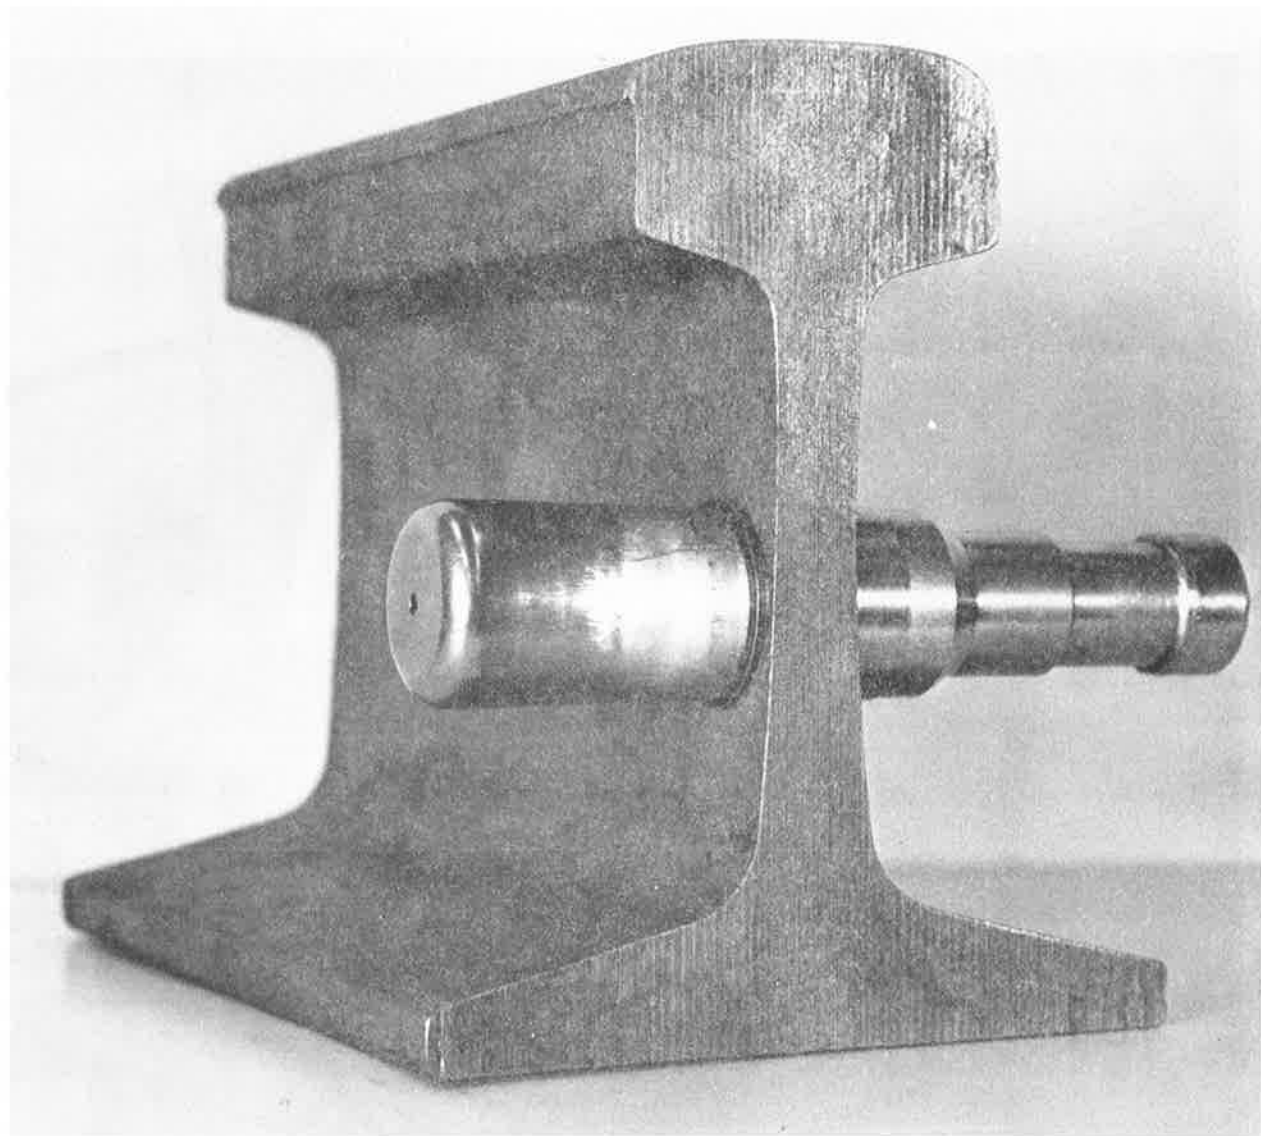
Mandrel Inserted in Bolt-Hole Bore
